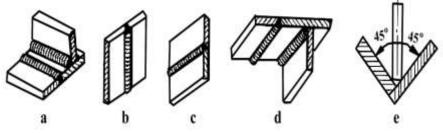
Possible space positions of welding: a-down (flat); b-vertical; c-horizontal; d-inverted (overhead); e-in-corner
